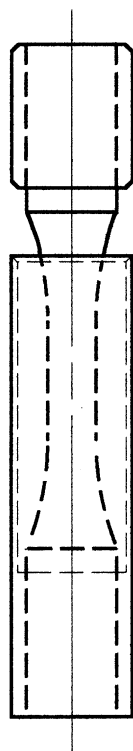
Fatigue specimen with bushing and vial for containment of mercury.
